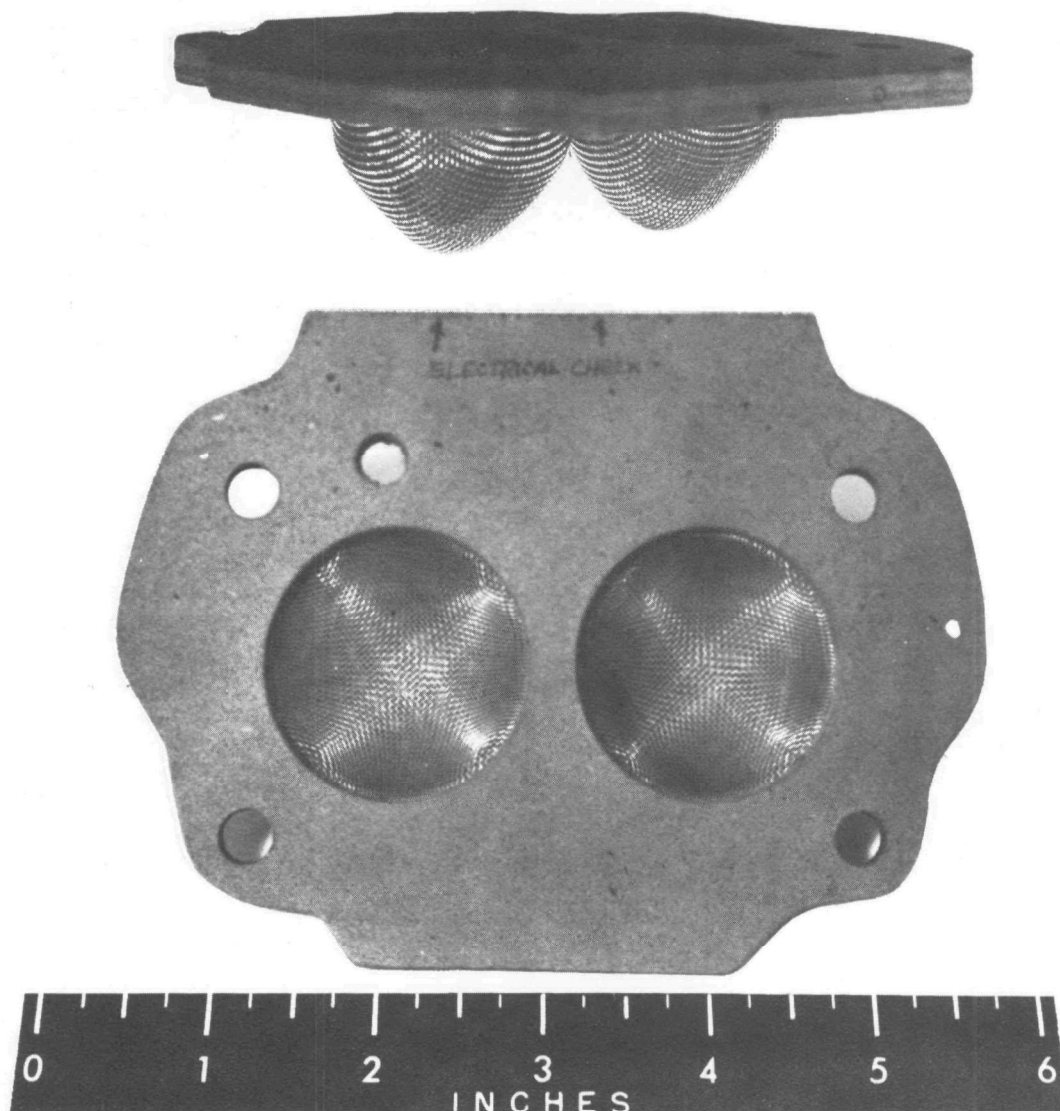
DEVICE 384 AIR-FUEL MIXTURE DIFFUSER (CONFIGURATION FOR TWO-BARREL CARBURETOR)
